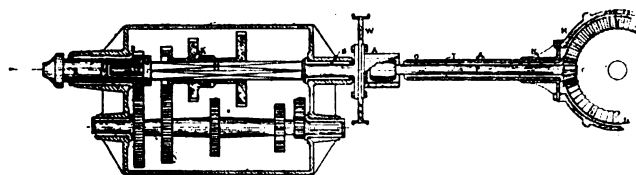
Section of Tony Huber Change-Speed Gear and Cardan Shaft.
